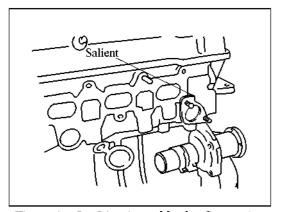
5 - 94 Assemble the Connecting Water Conduit
